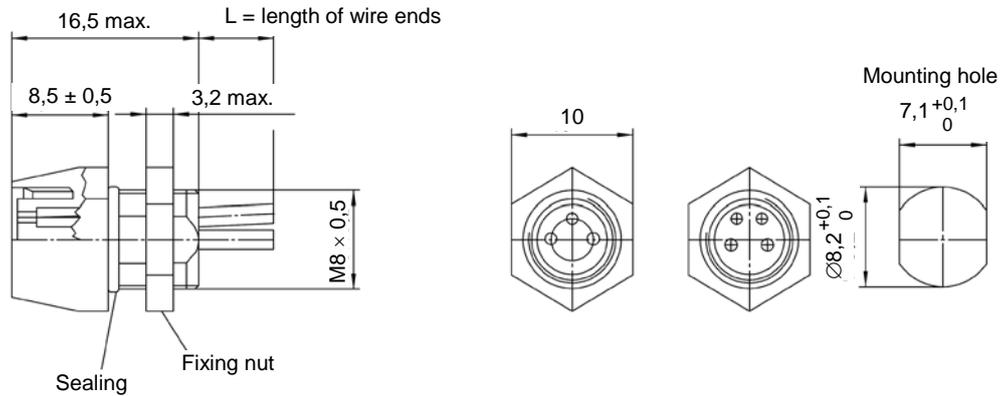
Fixed connector with wire ends, female contacts, single hole mounting
